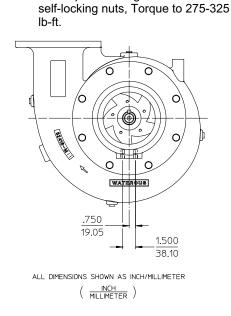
shows the mounting areas on a S100PA pump. To mount the pump/ transmission to the vehicle chassis, fashion a bracket that will span the frame rails of the vehicle and attach to the transmission mounting holes.
